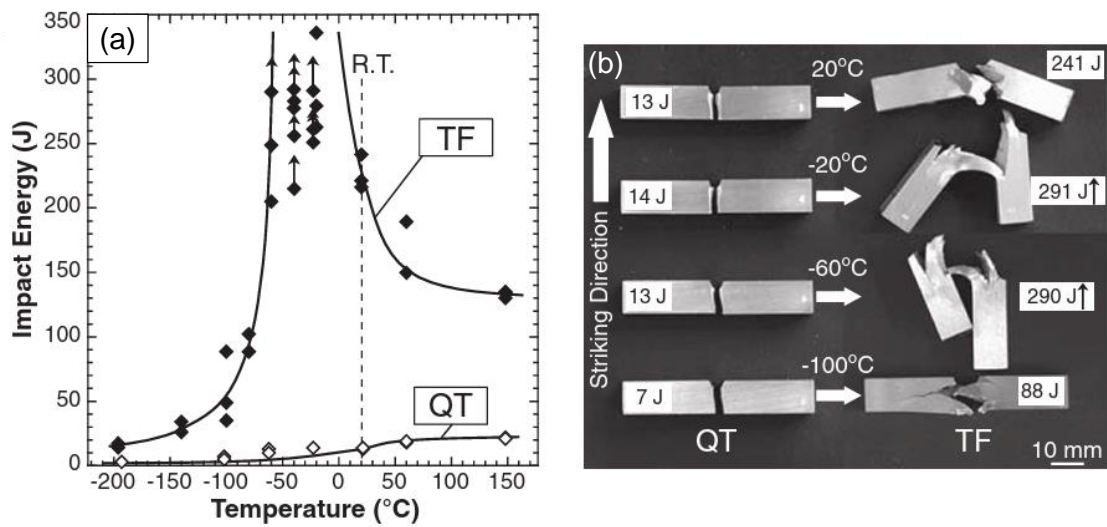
(a) Results of the Charpy V-notch impact test for the specimen shown in Fig. 1-15 and (b) tested specimen after fracture.⁽⁶¹⁾
